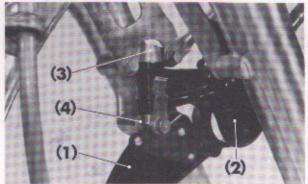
(1) Disc cover (2) Caliper body (3) Caliper joint (4) Caliper pin
